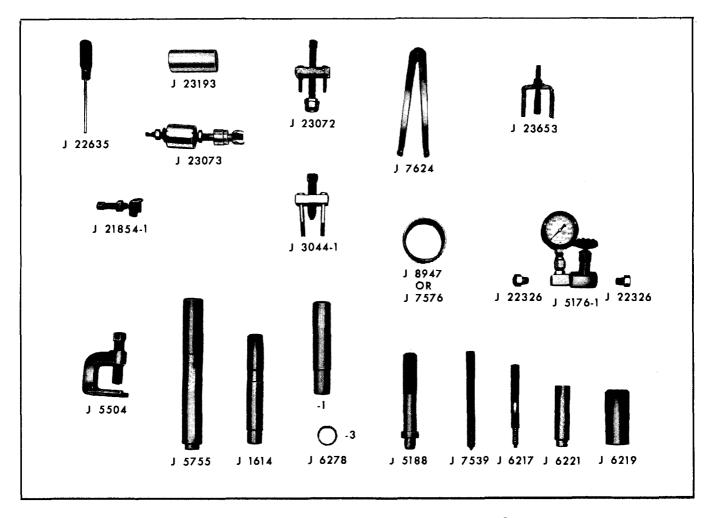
Special Tools for Steering Columns and Steering Gears
